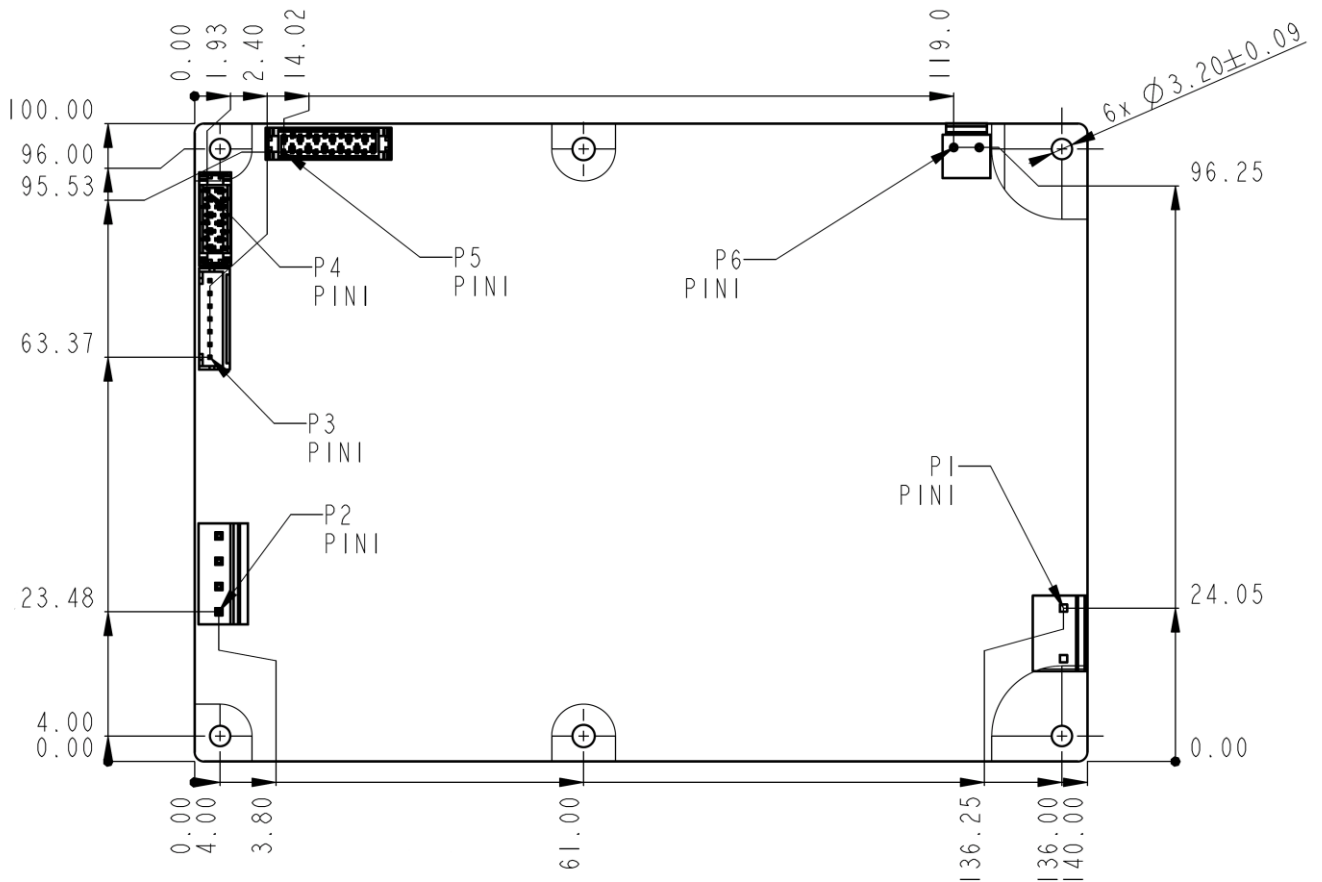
ICEpower400SM mechanical outline. Dimensions in mm.
